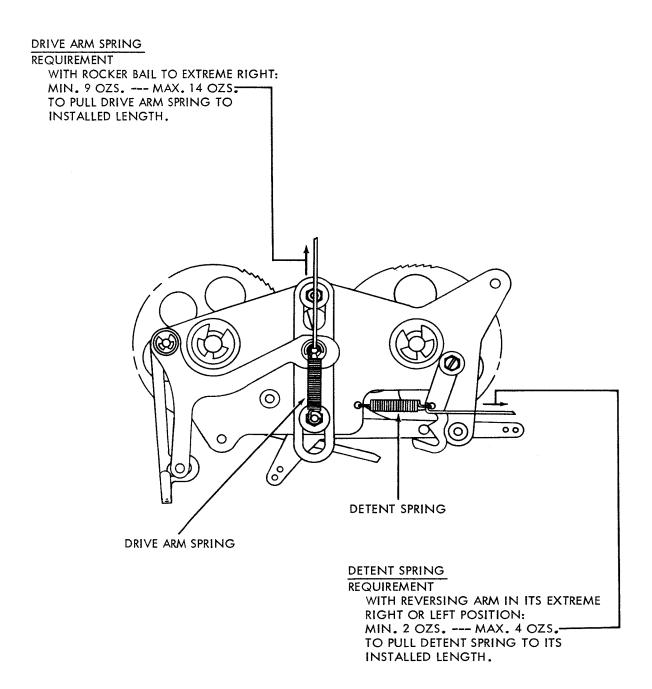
F. TYPING REPERFORATOR TT-373/UG, TT-375/UG, RIBBON FEED MECHANISM - LATEST DESIGN
